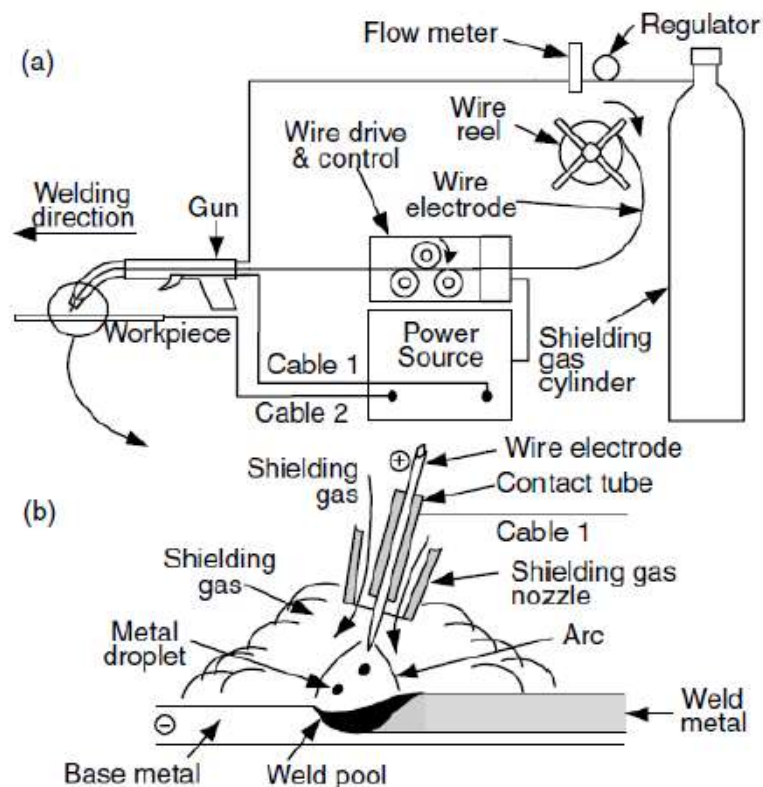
MIG welding: (a) overall process (b) welding area enlarged
